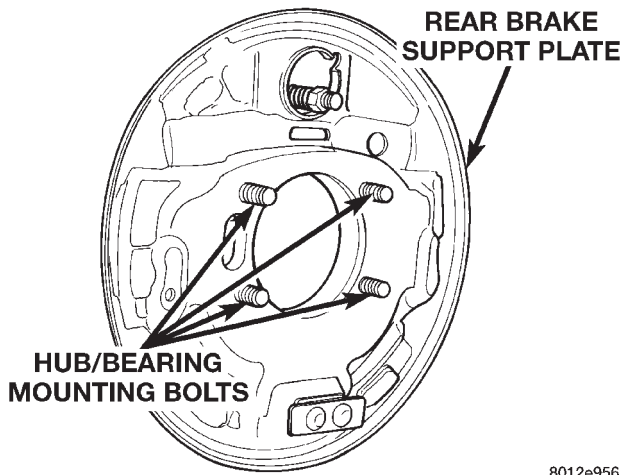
Brake Support Plate Mounted On Bearing Attaching Bolts
